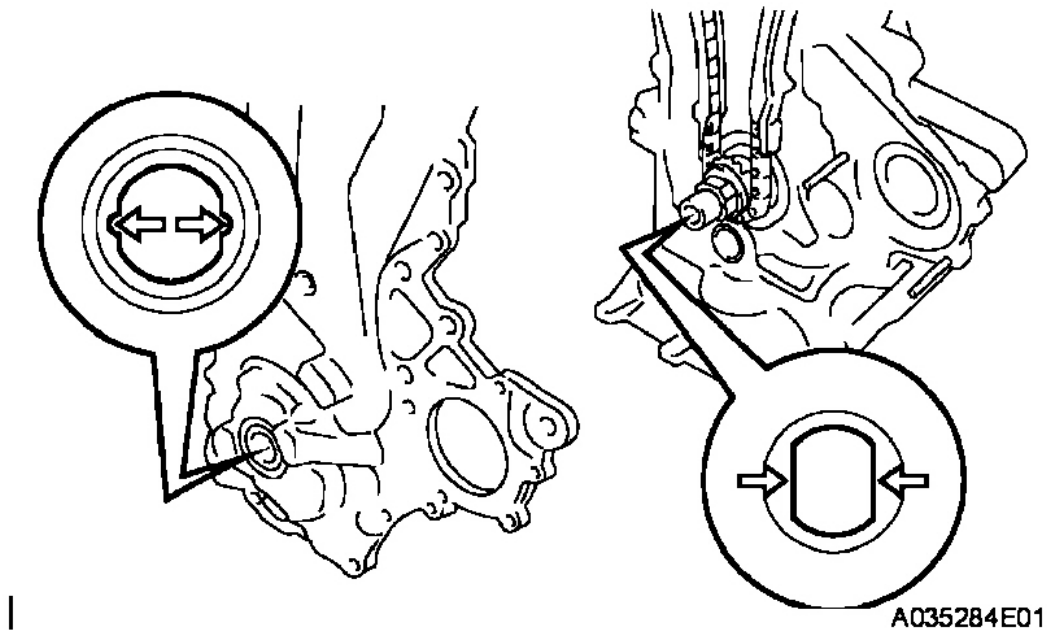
Aligning Keyway Of Oil Pump Drive Rotor With Rectangular Portion Of Crankshaft
